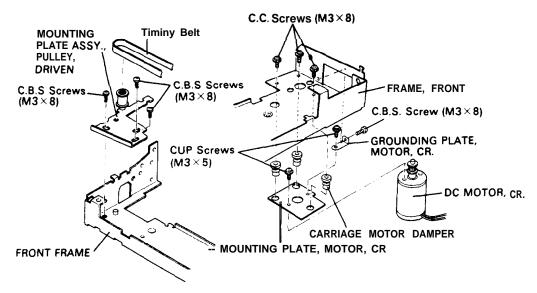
Carriage Motor (DC MOTOR, CR) Removal
